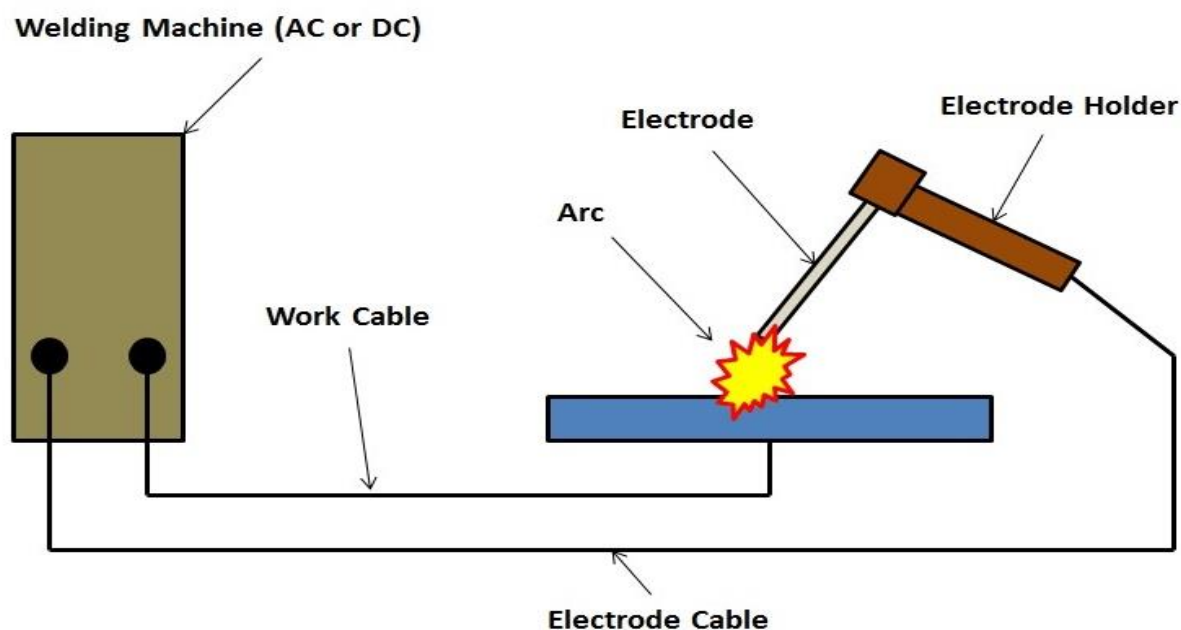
Basic Arc Welding Circuit Diagram
